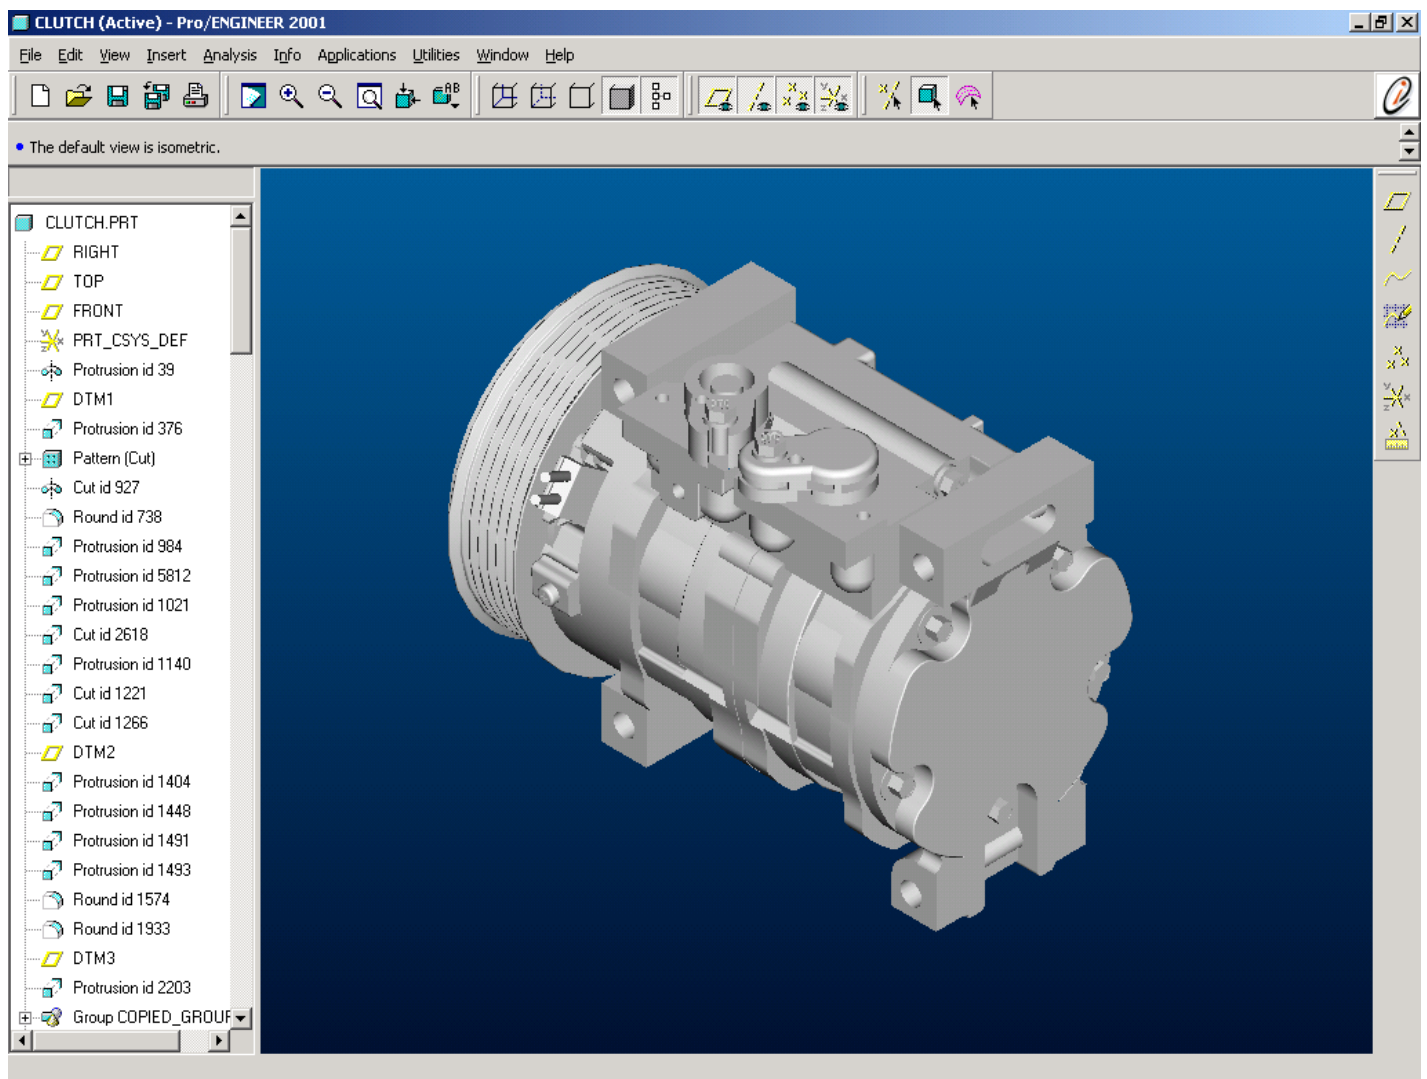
Isometric View Of Compressor Assembly Magnetic Clutch
